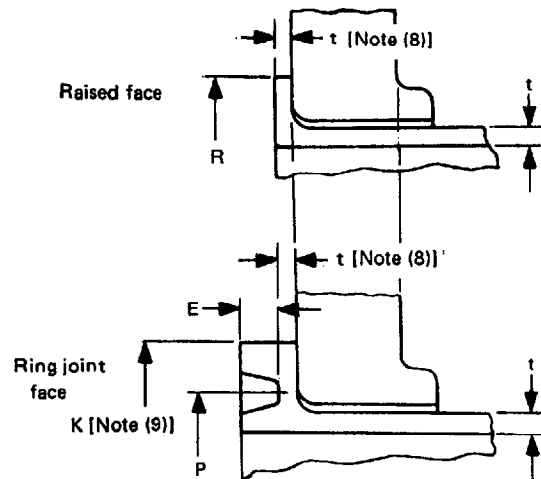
END FLANGE FACINGS AND THEIR RELATIONSHIP TO FLANGE THICKNESS AND CENTER-TO-END AND END-TO-END DIMENSIONS^{1,3} (CONT'D)
